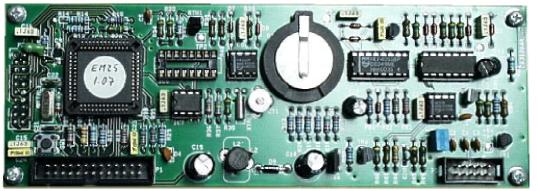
DETAILED VIEW OF CONTROL UNIT.
